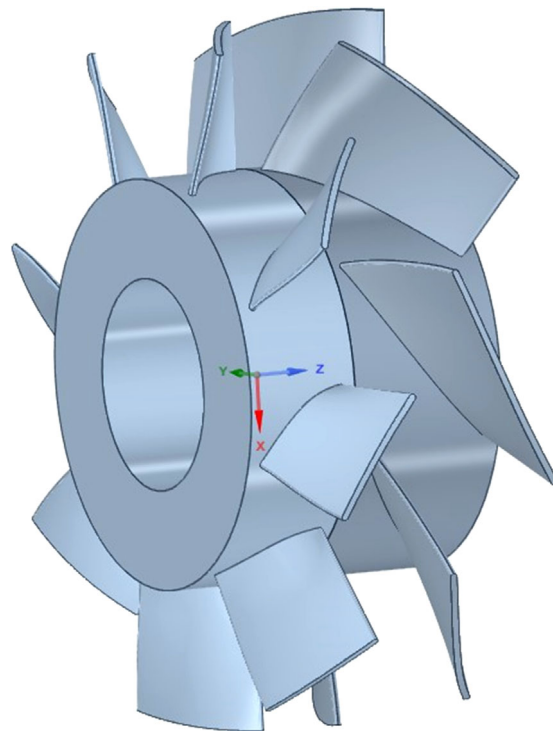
Initial Shaft-Driven Contra-rotating Reversible Pump Turbine (SD-CRRPT) design
